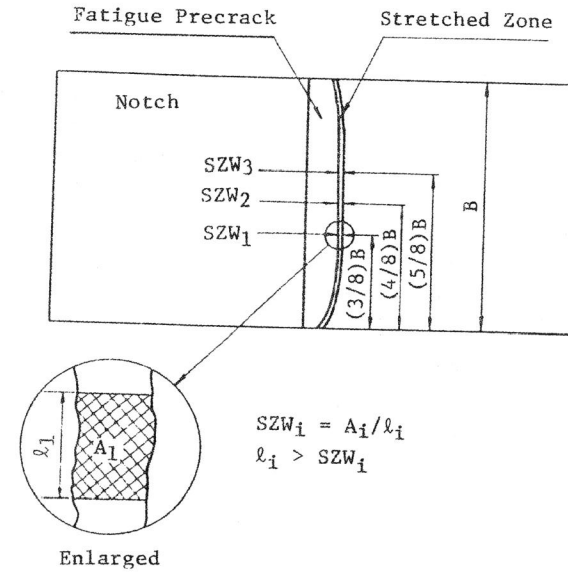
Schematic fracture appearance of J_{IC} specimen and measurement of SZW in the JSME Standard.
